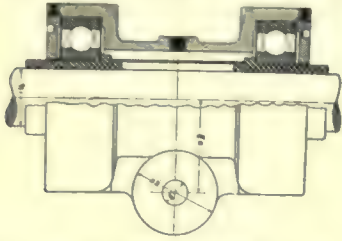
Double Annular Bearing for Pressure Blowers and Exhaust Fans.
